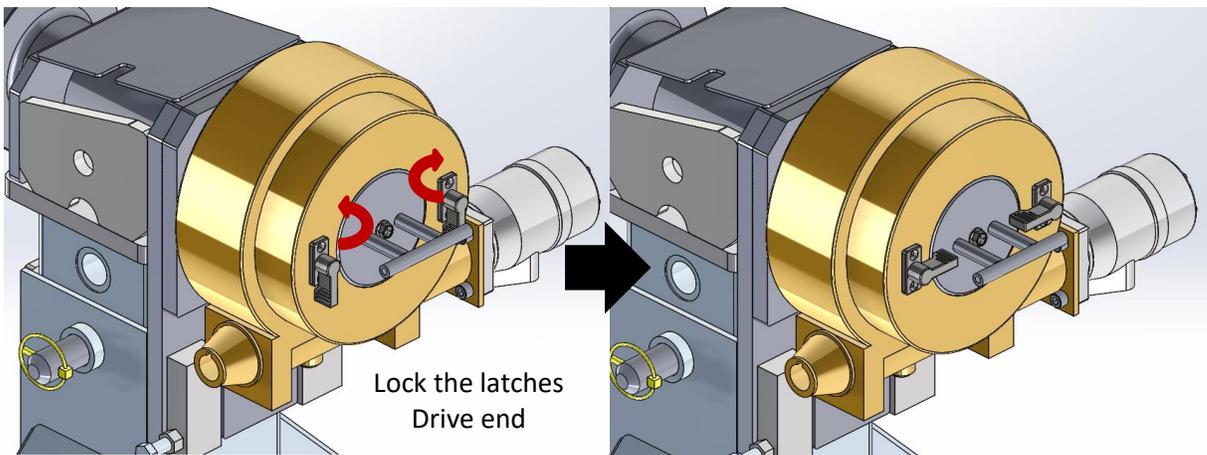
Operating Procedure for Welding Fixture Changeover, Lock Safety Latches, Drive End
